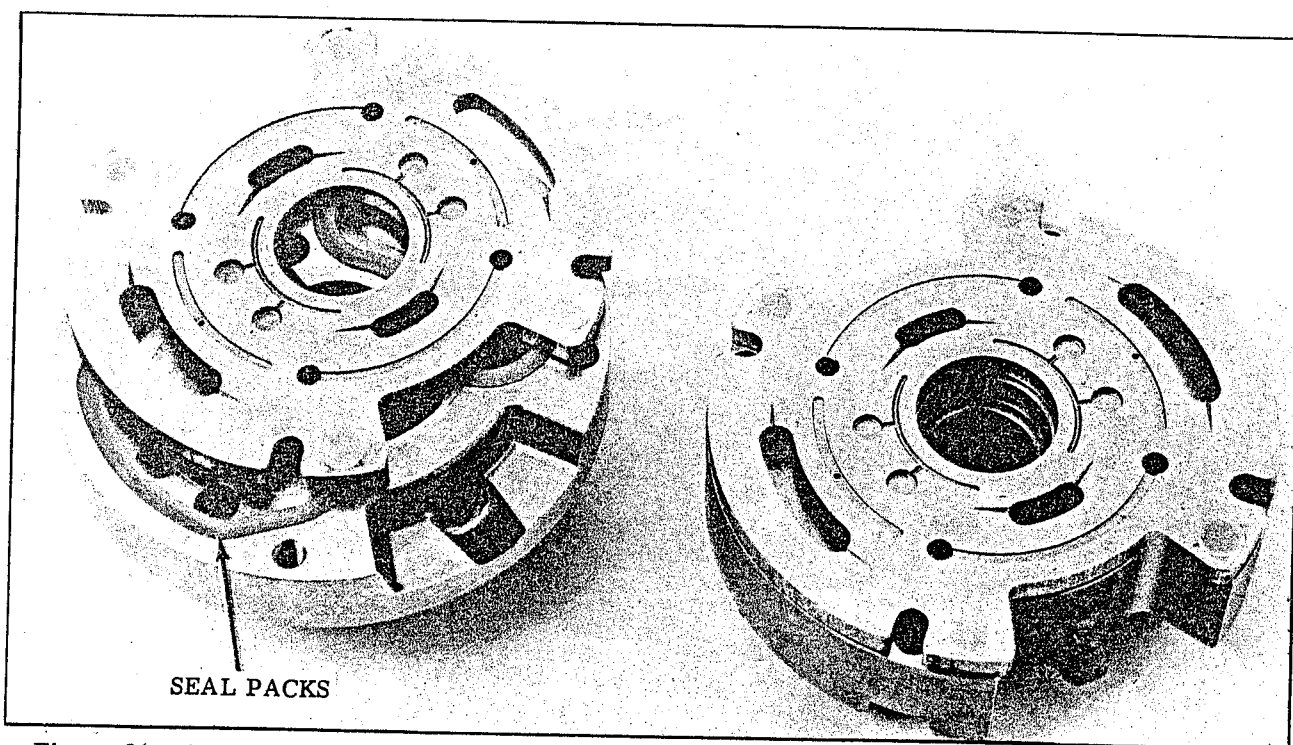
Assembly of Flex Side Plates over Seal Packs onto the Inlet and Outlet Support Plates.
